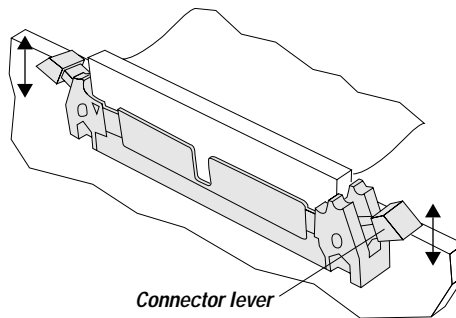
Detail of a Fiery XJ BP100 board ribbon cable connector
